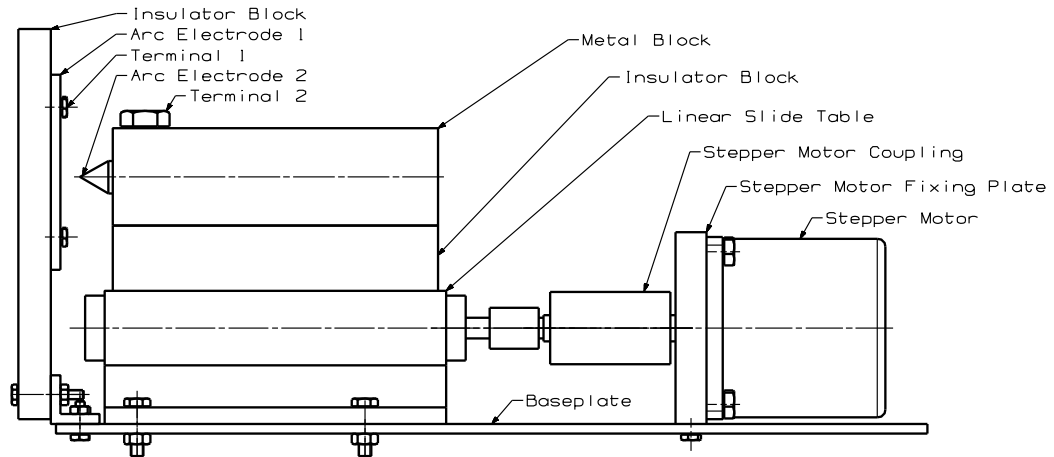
Drawn Arc Generator Side Projection Drawing
